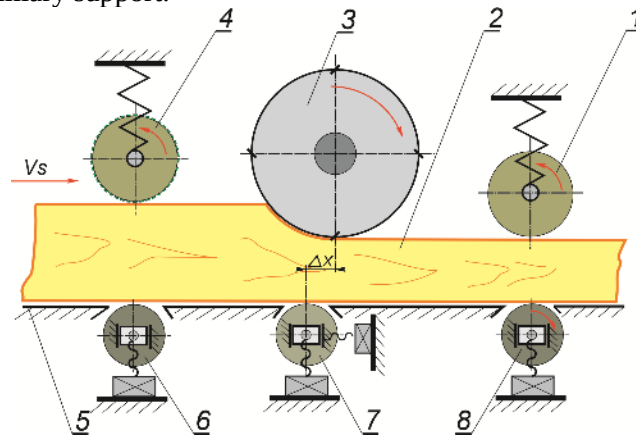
Schematic diagram of the new workpiece clamping mechanism for the planer: 1 – rear feed roller; 2 – workpiece; 3 – cutter shaft; 4 – front feed roller; 5 – table; 6 – table support roller; 7 – additional supporting roller; 8 – base roller of the table.
